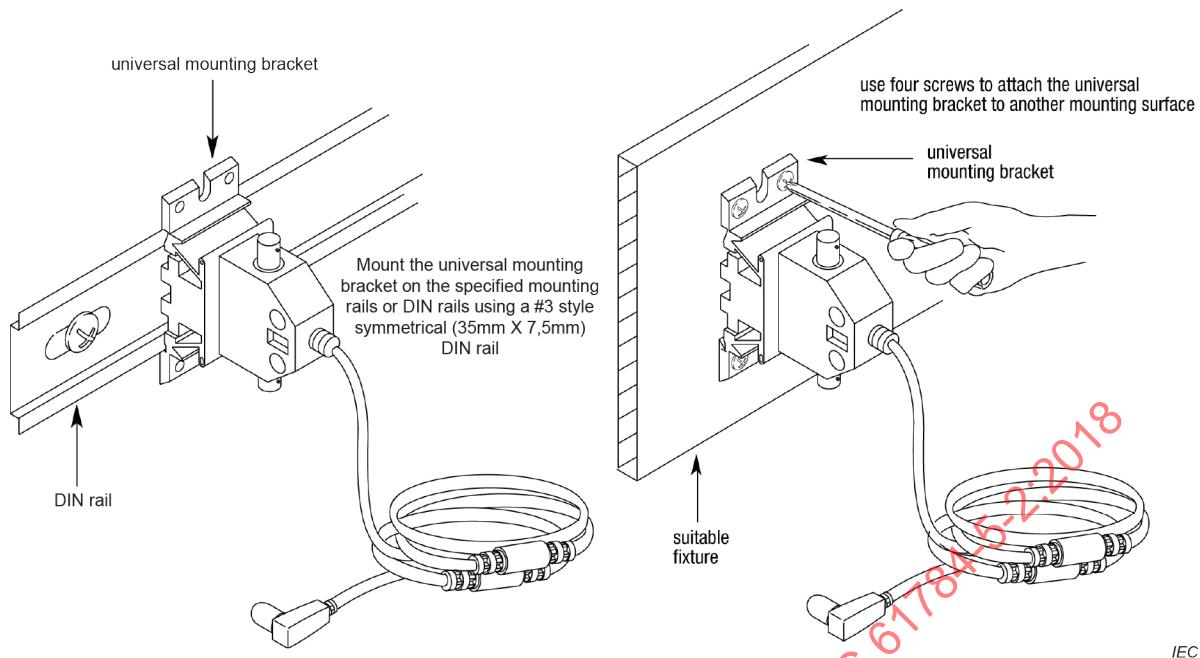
Mounting the tap assembly using the universal mounting bracket
